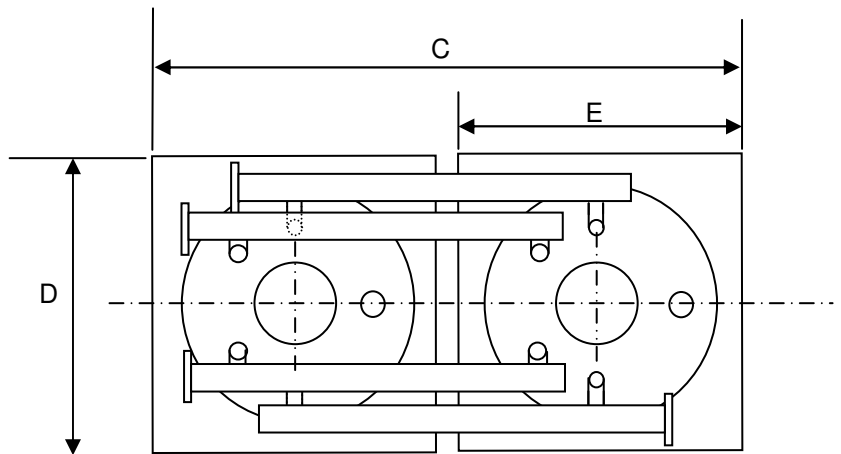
Modular Header Kit Assembly Dimensions (cont....)
